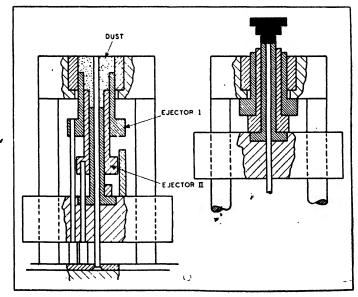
(b).—A more complicated mould is required for dust pressing. (Electrical Review.)
